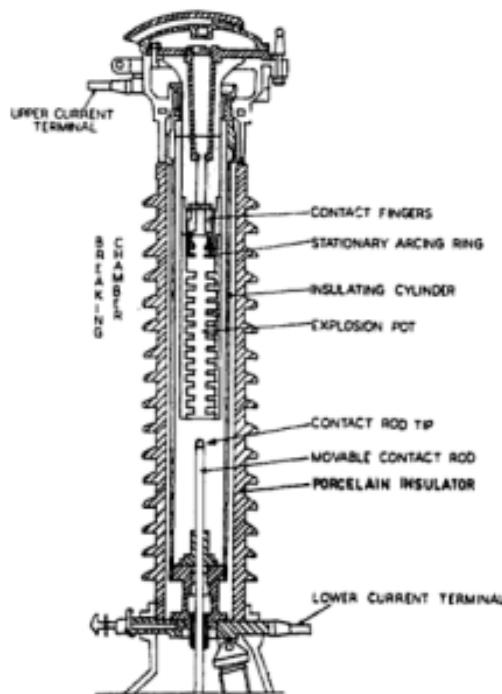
Sectional view of a typical high voltage minimum oil circuit breaker
